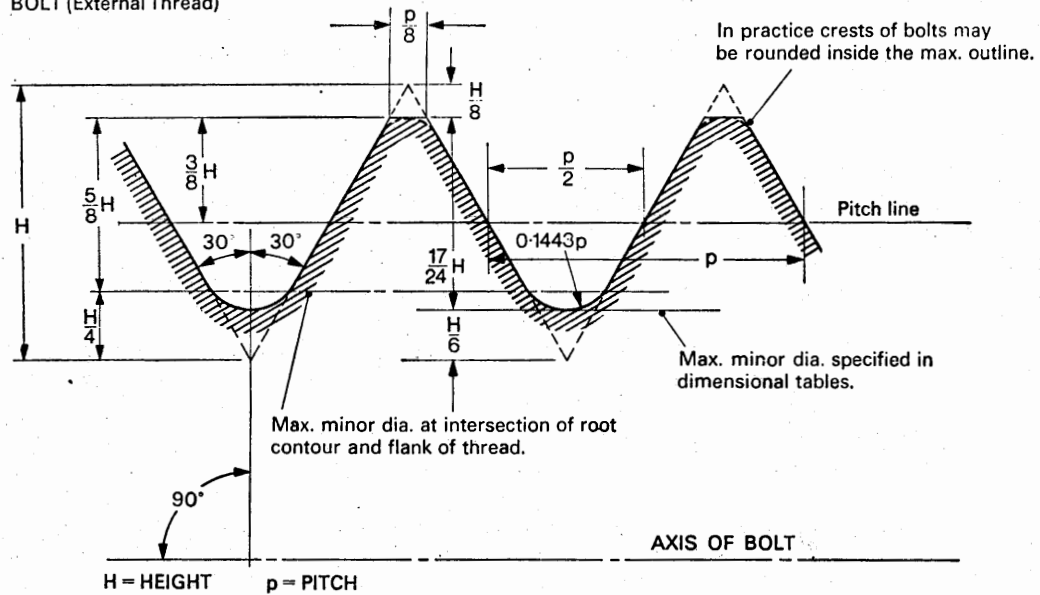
DESIGN FORM OF UNIFIED THREAD (MAXIMUM METAL CONDITION)
